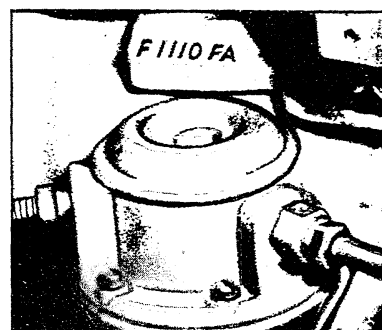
Four and Six Cylinder Engine Unit Number Located on Pad at Right Hand Side of Cylinder Block at Rear of Distributor
